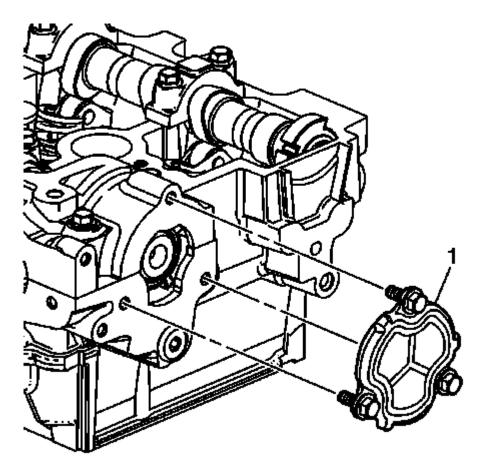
Intake Camshaft Position Actuator Solenoid Valve Courtesy of GENERAL MOTORS COMPANY
